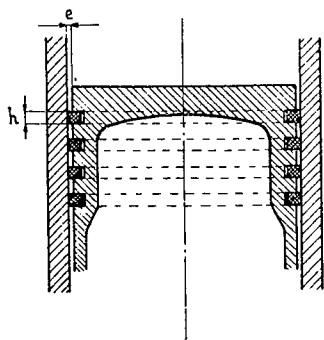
Piston-cylinder system fitted with elastic piston rings.
